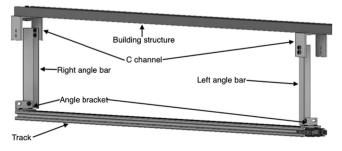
CAD model of the assembly of the aluminum extrusion attached to the structure of the greenhouse.
